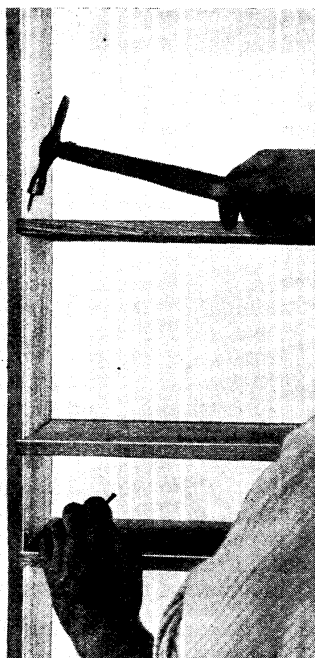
Fixing shelves by nails driven through from inside. This keeps them rigid in their housing
